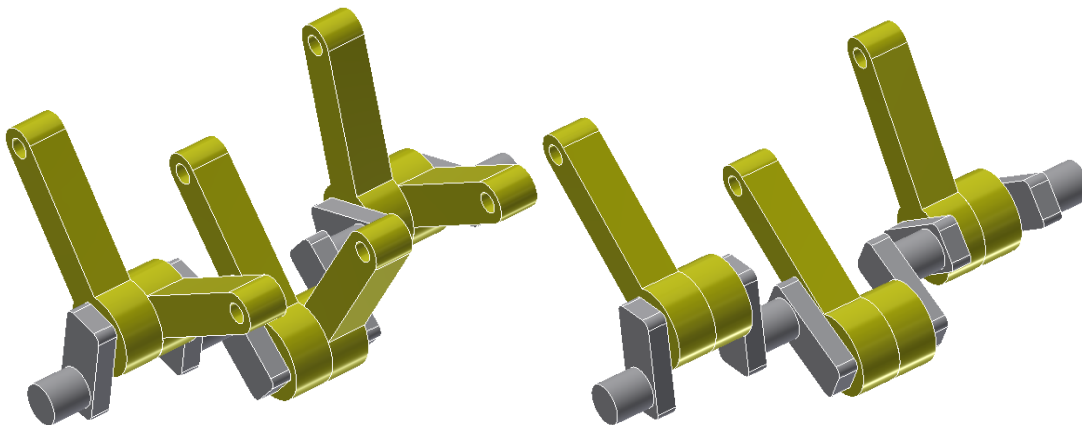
Connecting Rods Arrangement on the V6 Engine (Left) and Single Cylinder Engine (Right)
